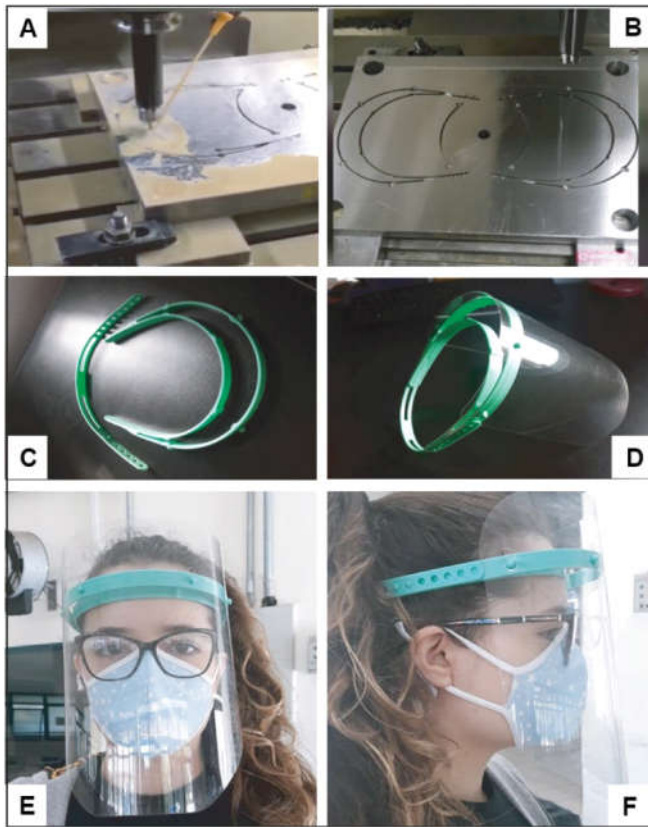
Higia face shield production through the injection molding process (IM). A) Metal mold production (Coral Dent company, Brazil). B) Metal mold. C) Face shield frame. D) Assembled face shield. Frontal (E) and lateral (F) views of a user with the face shield.
